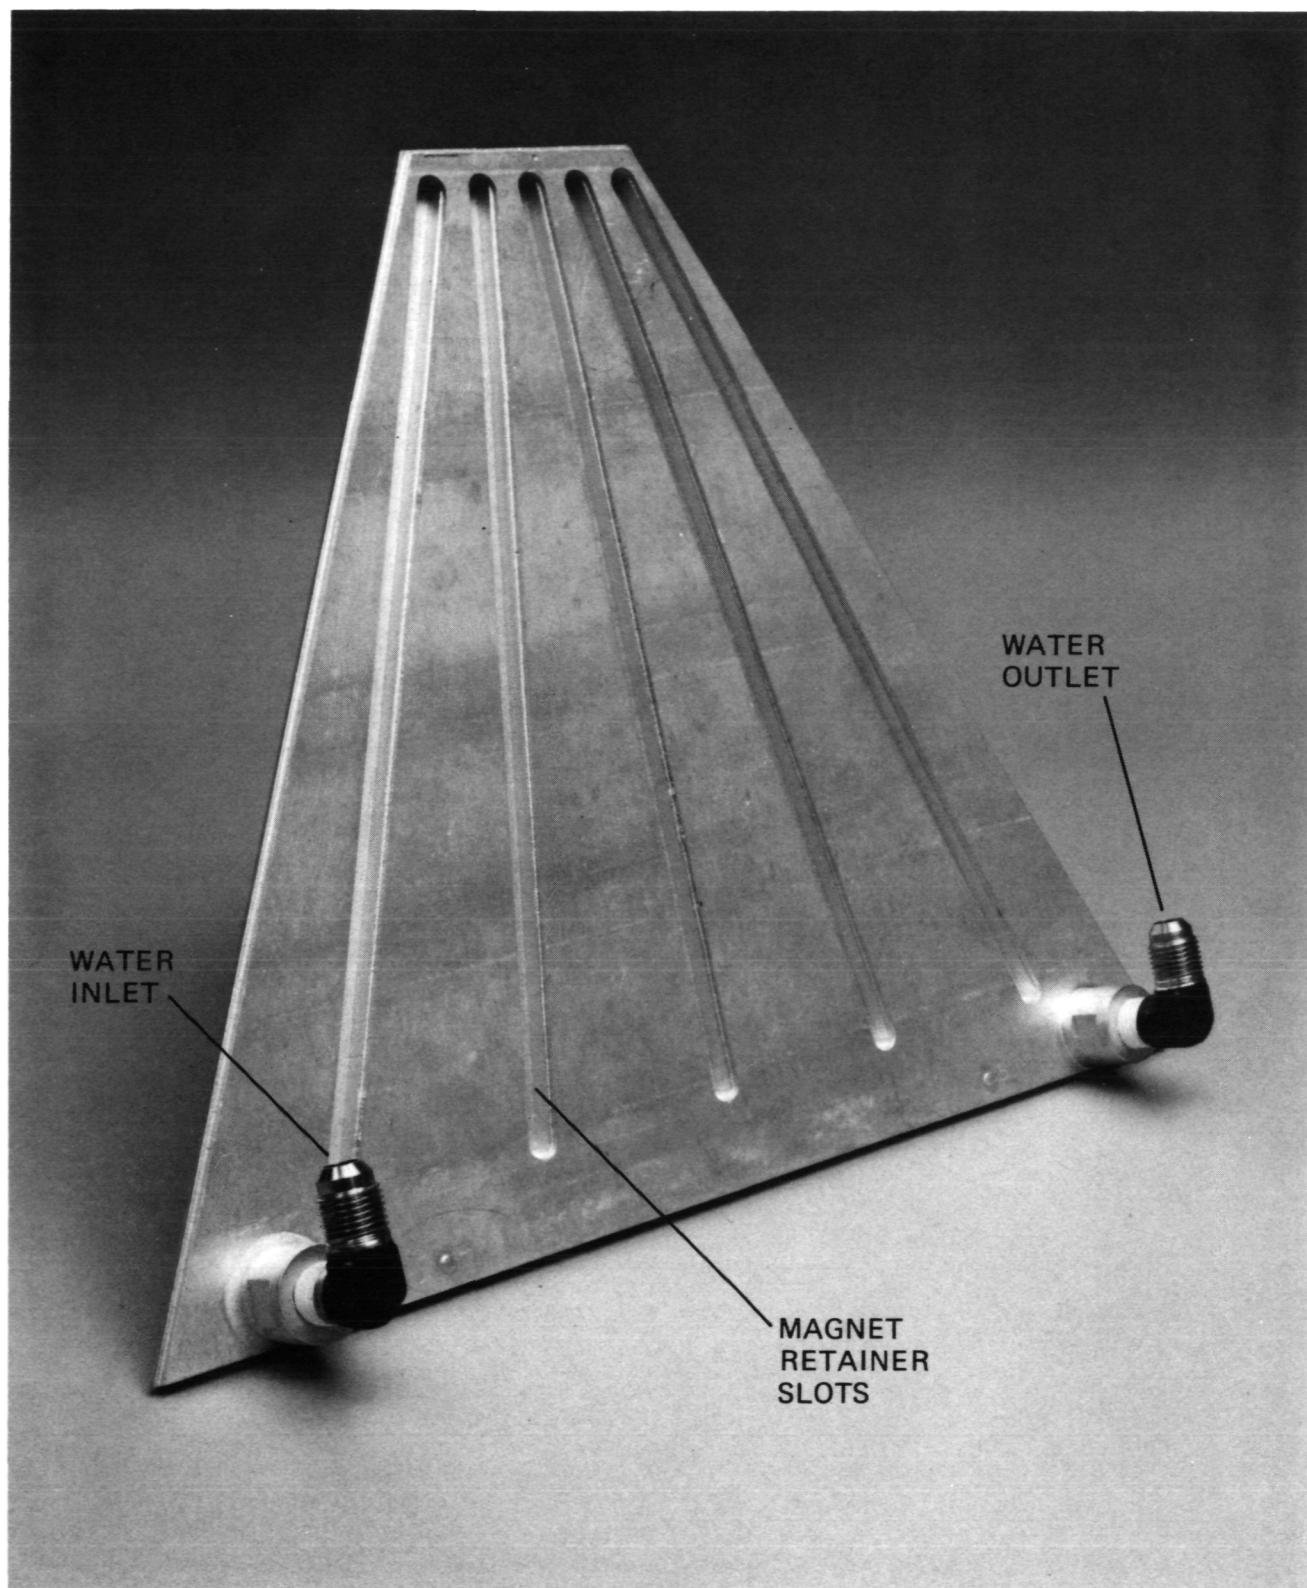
DLC Discharge Chamber Side Plate Prior to Final Assembly
